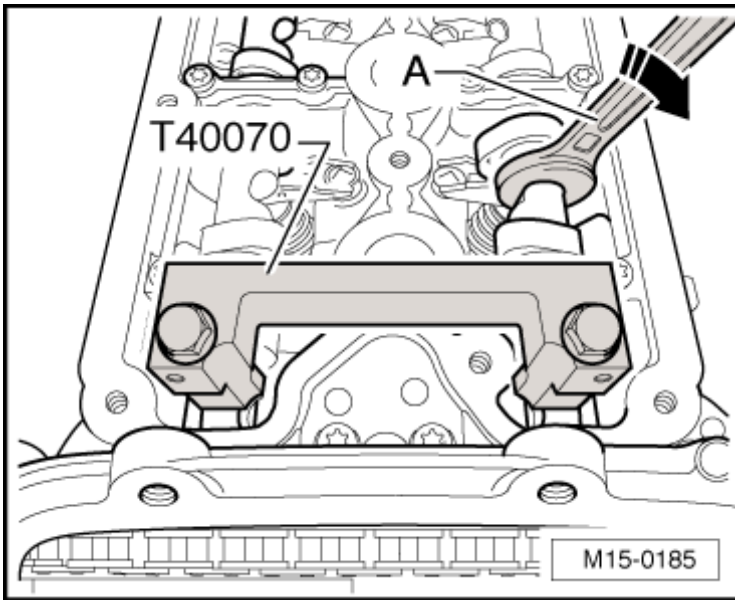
Identifying Camshaft Clamp T40070 Installed On To Camshafts
